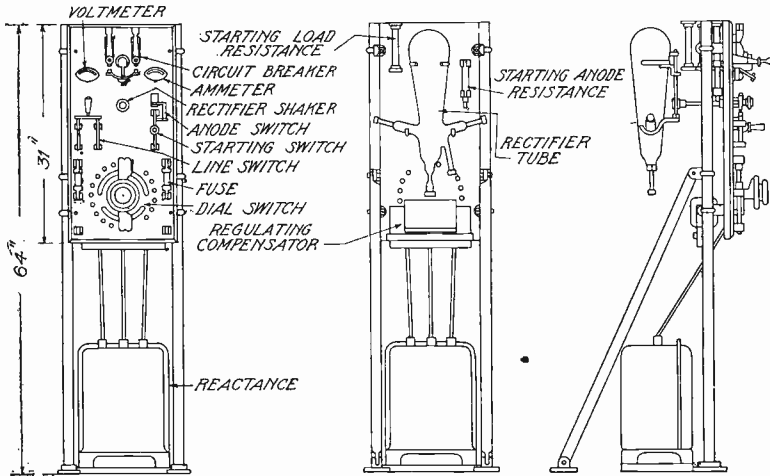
Diagrammatic Views of Front, Back, and Side of Rectifier Equipment Showing Details
